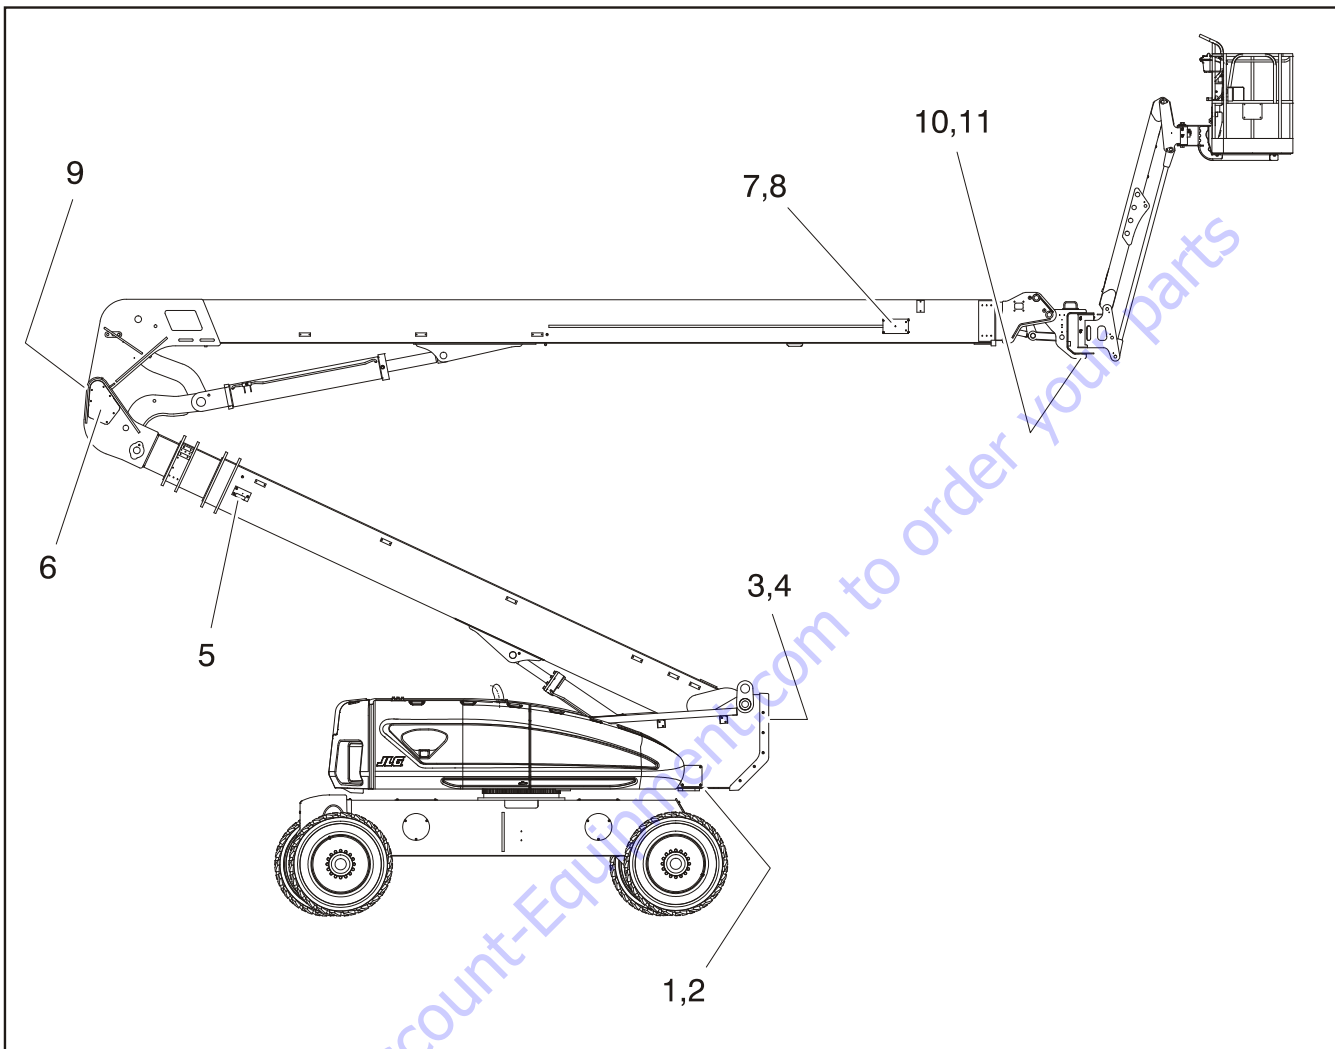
Tower Boom Powertrack Installation - Sheet 3 of 3
